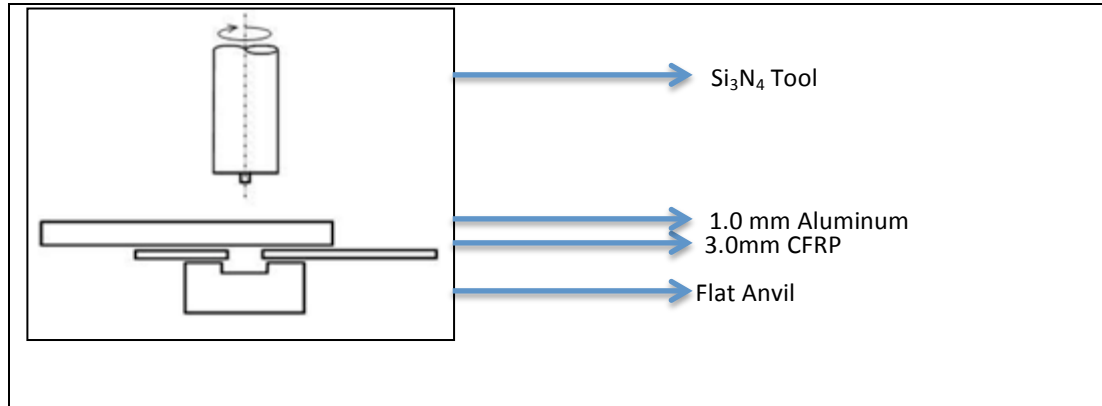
Basic machining setup for Al/CFRP combinations
